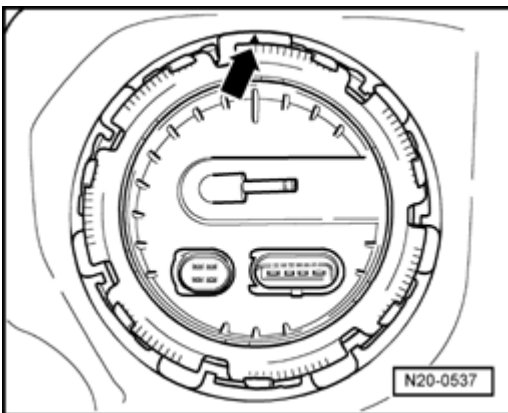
Installing Flanges With Alignment Tab In Direction Of Travel
